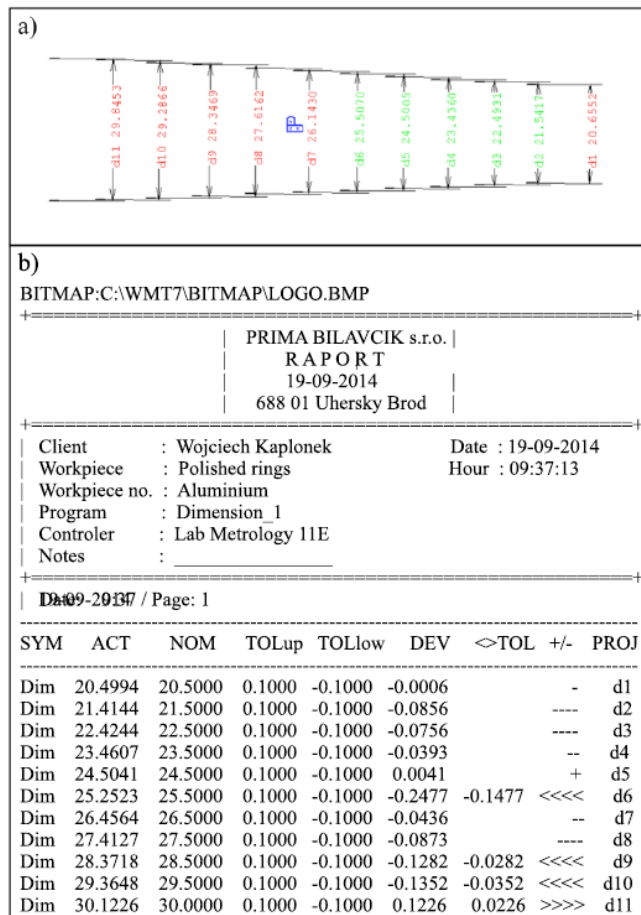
Measurement report obtained for a set of ring-type samples made for aluminium EN AW-6082 by bench-type multisensor coordinate measuring machine Video-Check® -IP 250 produced by Werth Messtechnik GmbH (Germany): a) visualization of measurement results including values of calculated dimensions, b) obtained real values and referred to nominal values, with calculated upper/lower tolerance and deviation.
